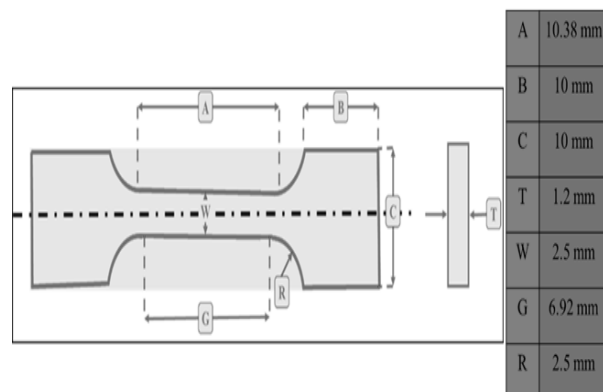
Dimensions of tensile test specimens used according to Jis Z2201
